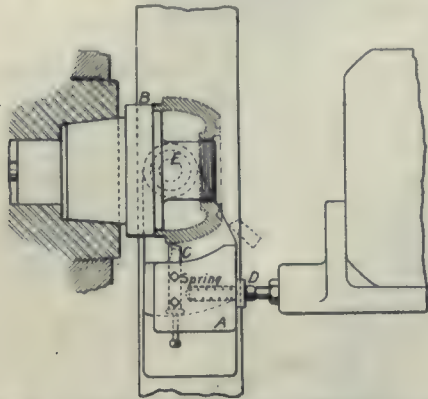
THIRD AND FINAL OPERATION ON SHRAPNEL SHELL HEADS FROM FORGED BLANKS.
